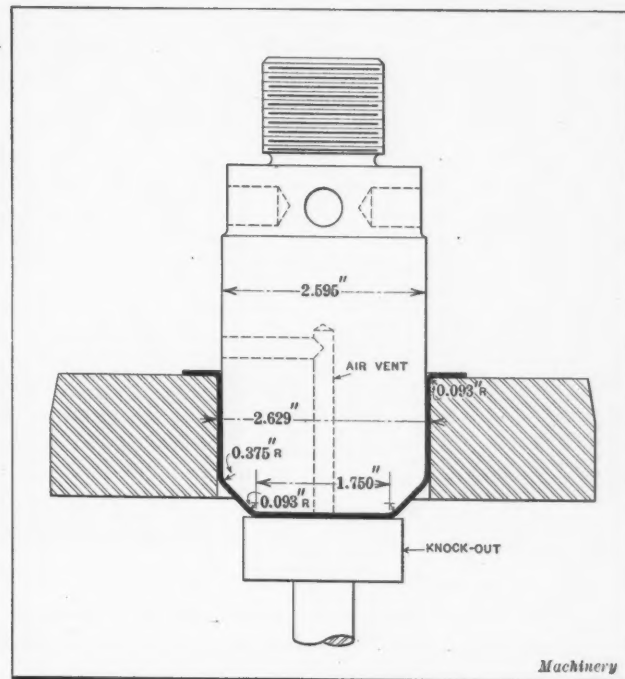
Single-action Press Equipment for the Second Drawing Operation
